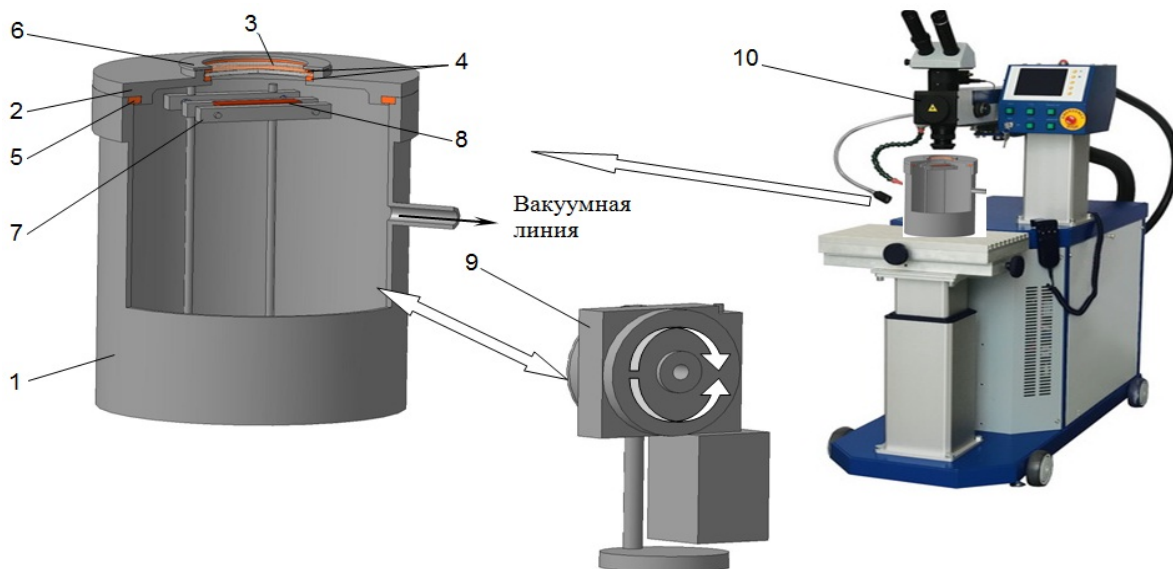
Equipment for laser welding in vacuum: 1–vacuum chamber body; 2–cover; 3–glass; 4, 5–vacuum rubber gaskets; 6–stopper ring; 7–clamp; 8–sample, 9–two-coordinate positioning rotator, 10–laser welding device LRS-150A
